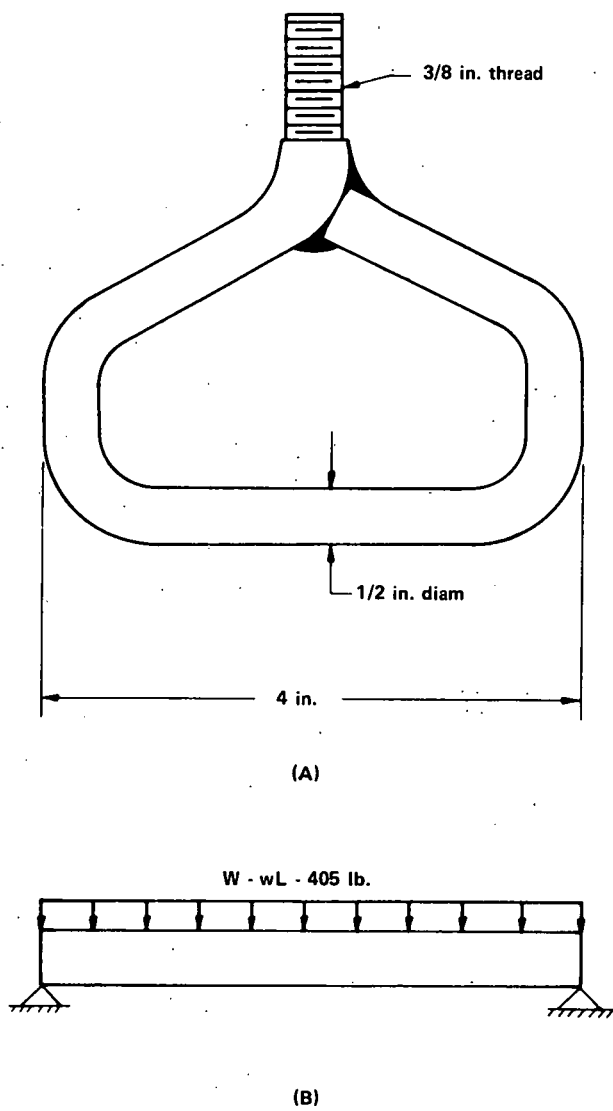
Tiedown stirrup used on type 6C drums.
